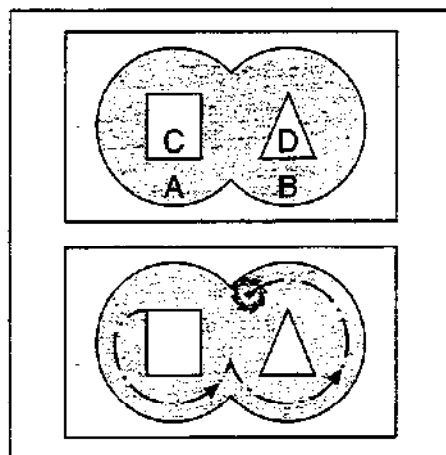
Cutter path for ROUGH-OUT. A and B are pockets, C and D are islands
